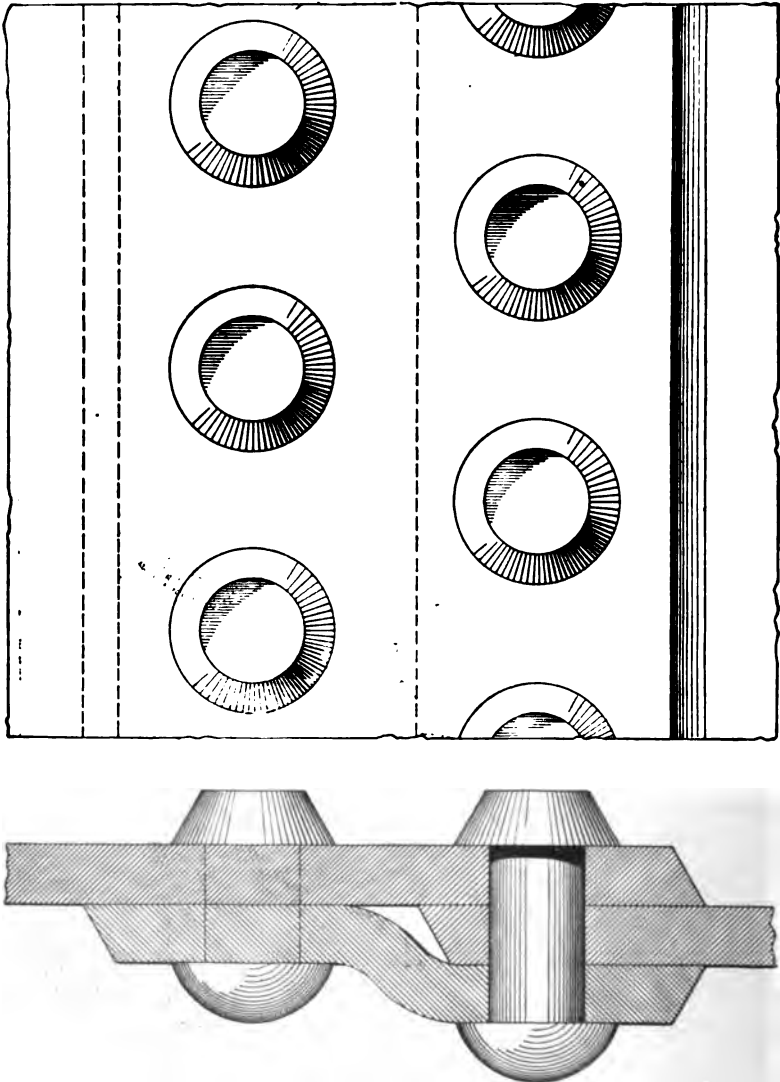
Single Riveted Lapped and Strapped Joint.
